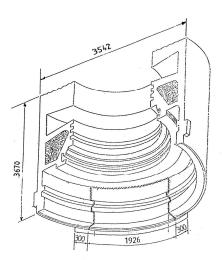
case after welding with DIN St37 cover plate.
